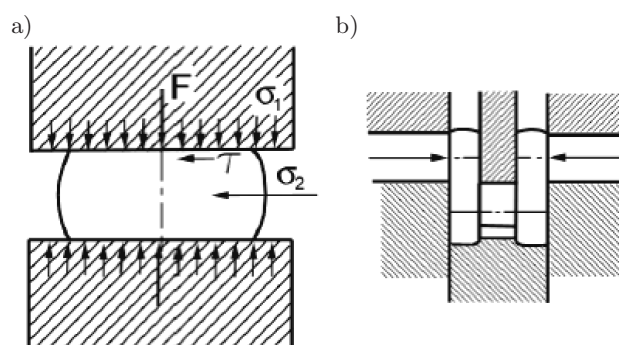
Diagram of forging [12]: a) free, b) semi-liquid.
